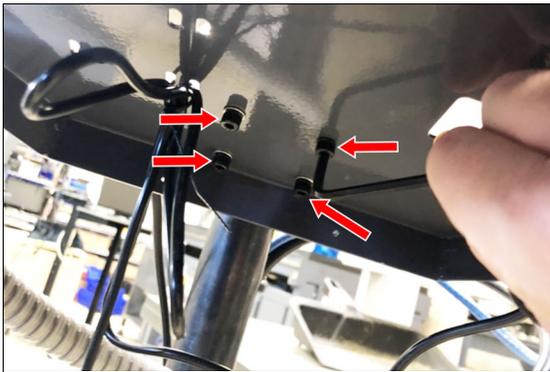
Attaching the keyboard tray to the lower controller arm mount (from below).
